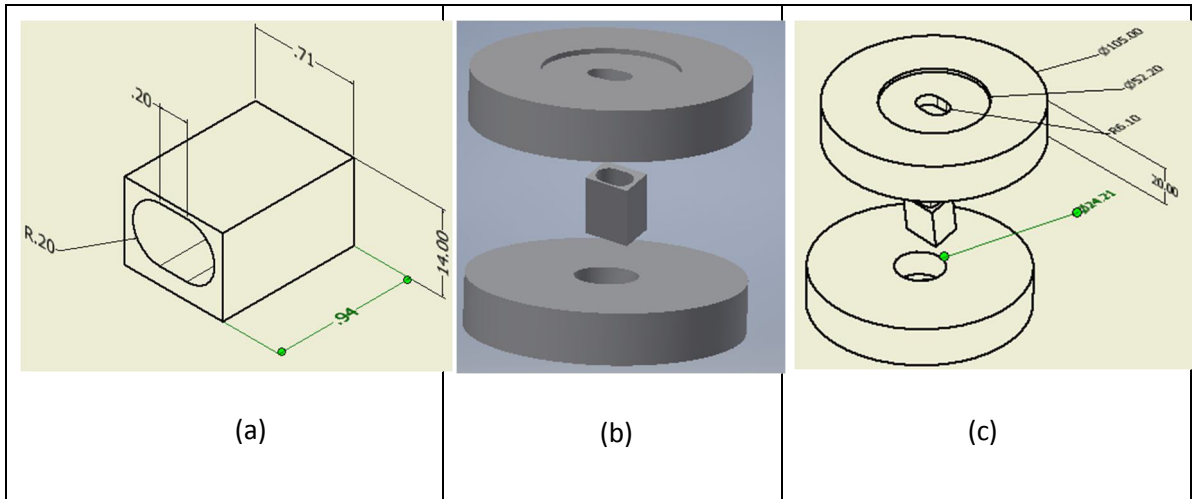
(a) HSS stamping die (mm) (b) Tooling scheme (c) Dimensions of tooling (Left and right part)
